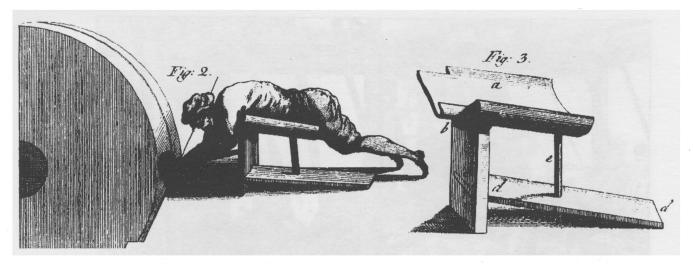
The cutter at work, with a detailed view of the special stool he uses (Collini 1776:Pl. XIV, Figs. 2-3).
